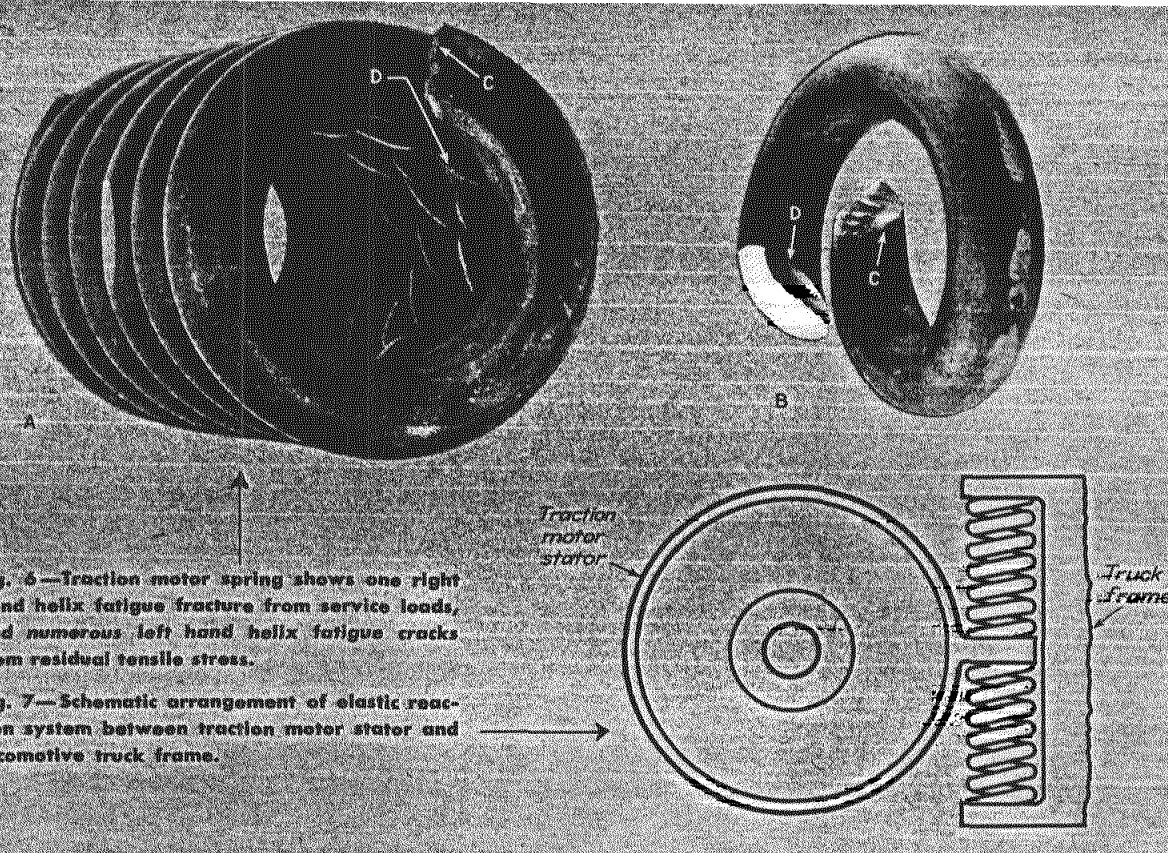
Traction motor spring shows one right hand helix fatigue fracture from service loads, and numerous left hand helix fatigue cracks from residual tensile stress.
